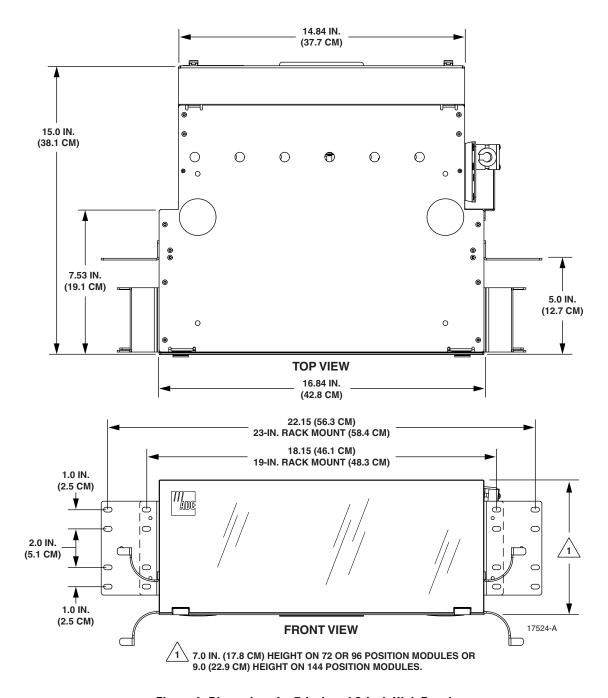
Dimensions for 7-Inch and 9-Inch High Panel
